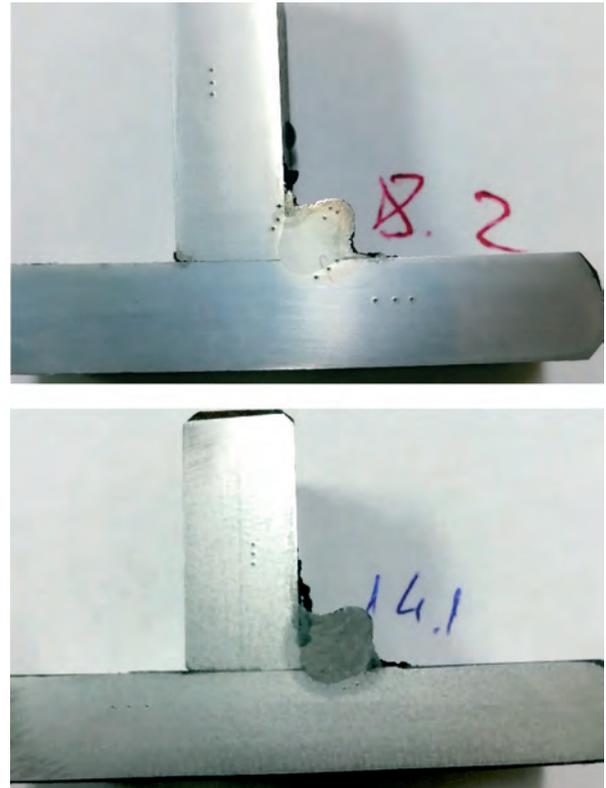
The aspects of macroscopic samples with incorrect weld toe.
